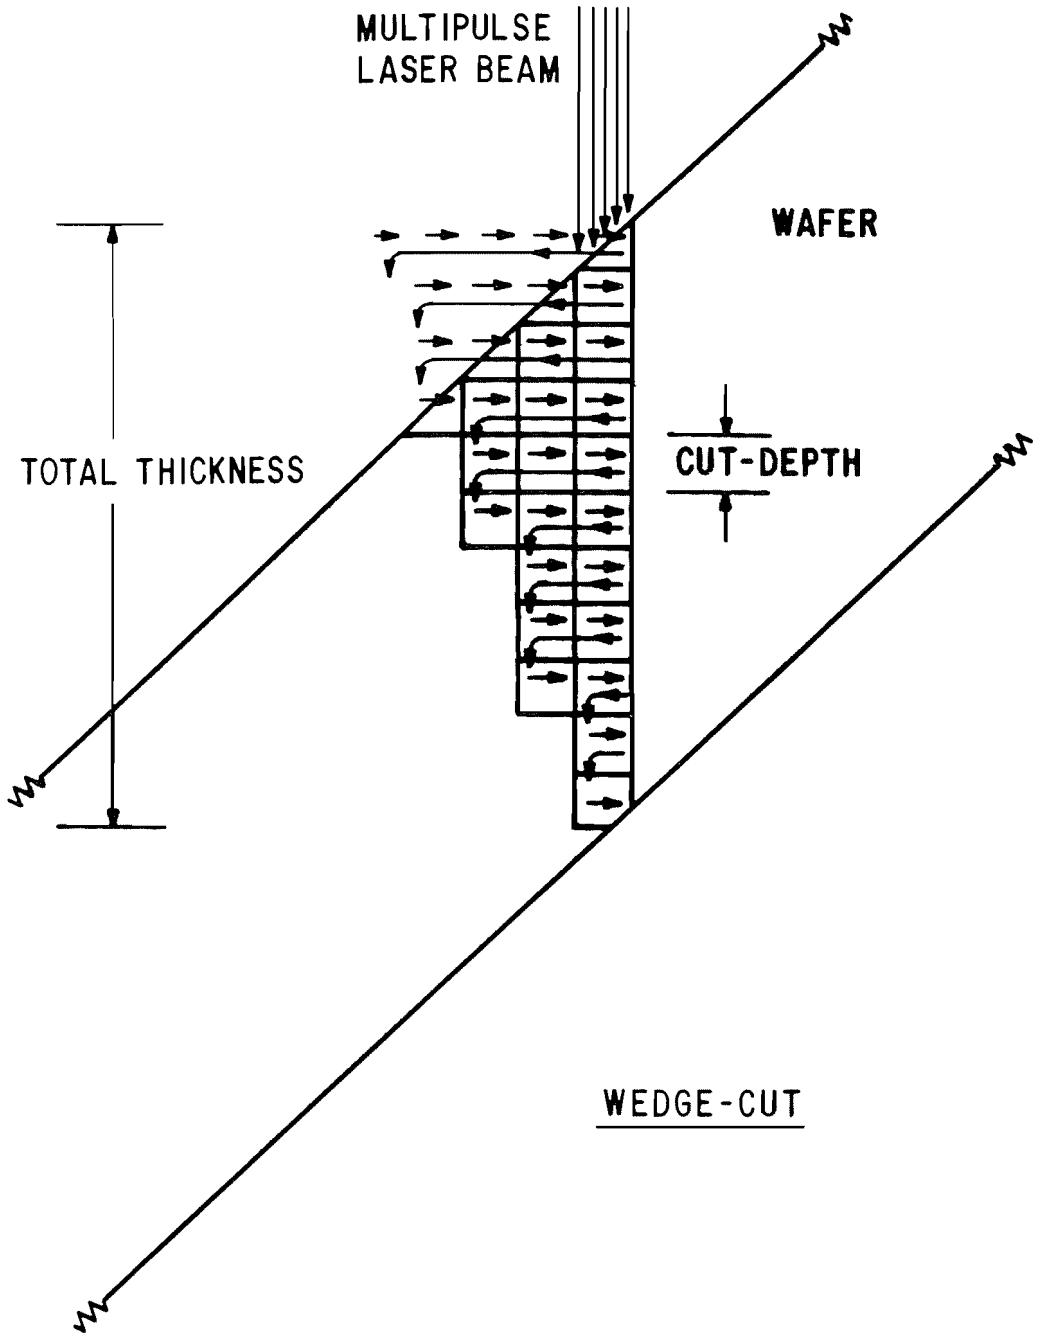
A schematic cross-section of a laser cutting a wedge cut through a rotating wafer at a 45° angle to the laser beam to form an edge bevel (WEDGE-CUT).
